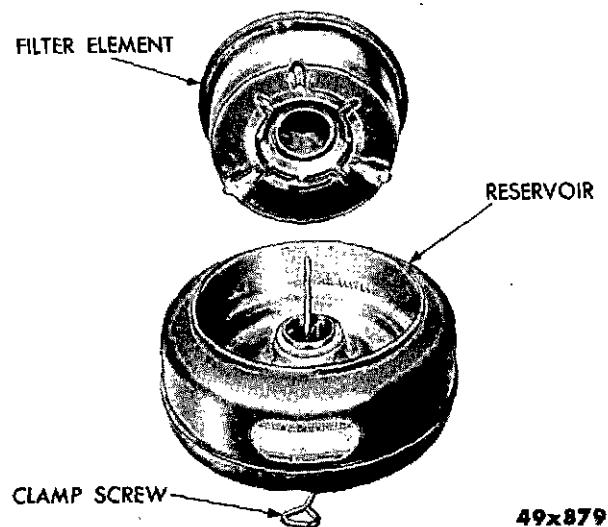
Typical Carburetor Air Cleaner (Exploded View)
